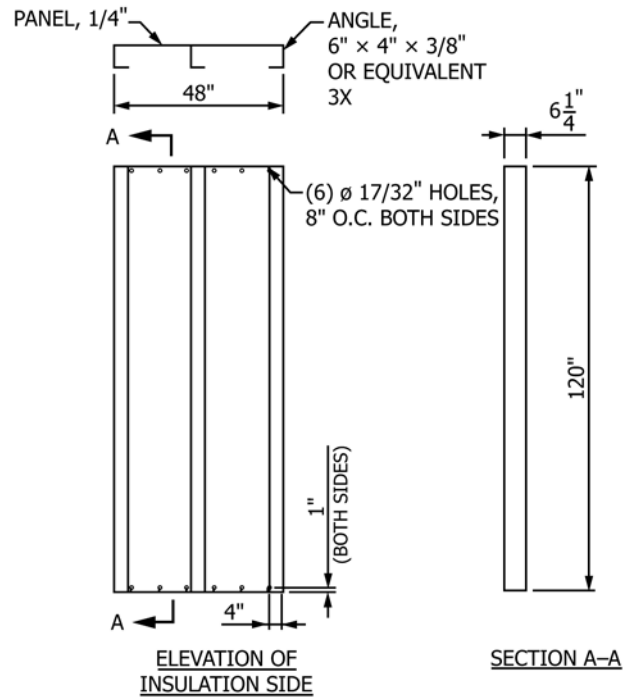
Aluminum Test Specimen Construction Details for A-Class Deck
